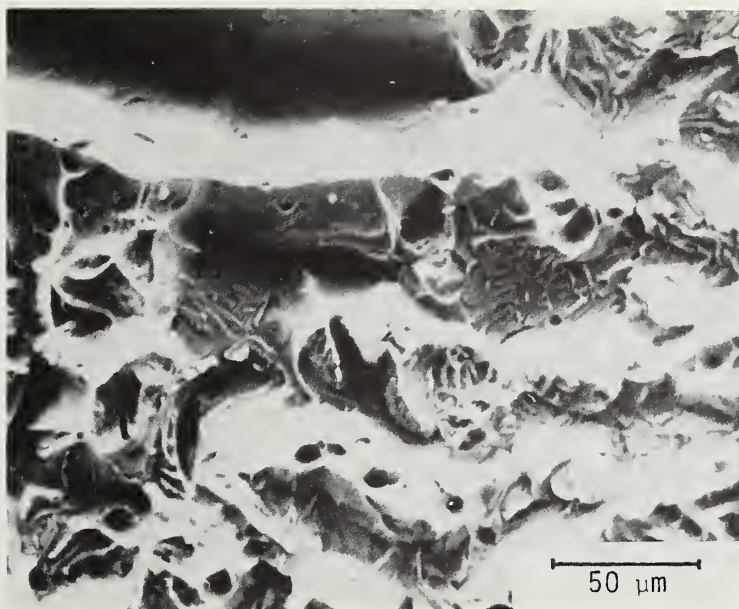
SEM fractograph of the fracture surface of a 316L electrosag weldment.
